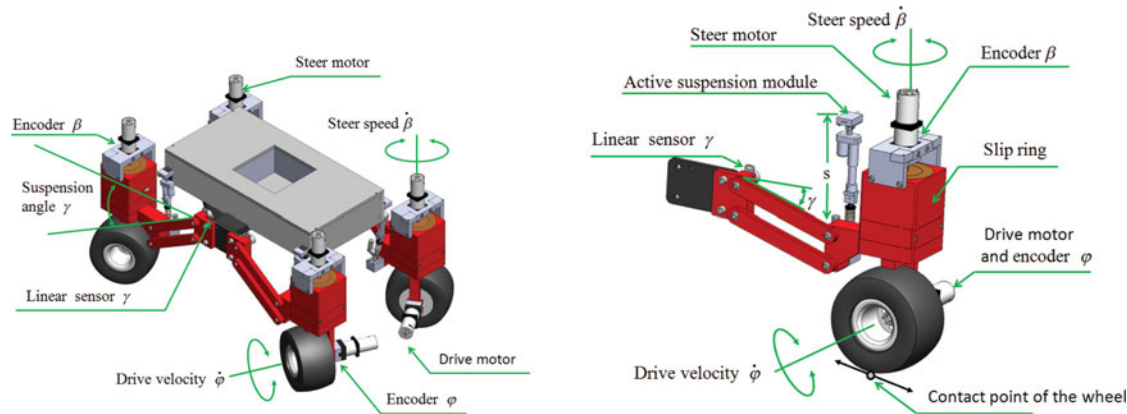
Design of the 4W robot mechanical prototype (above) and one-wheel suspension assembly (below).
